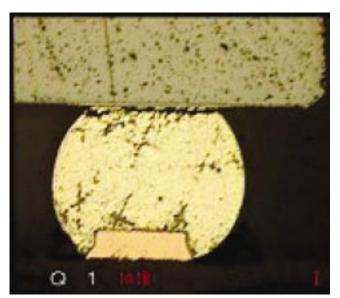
Solder Joint Failure Due to CTE Mismatch
